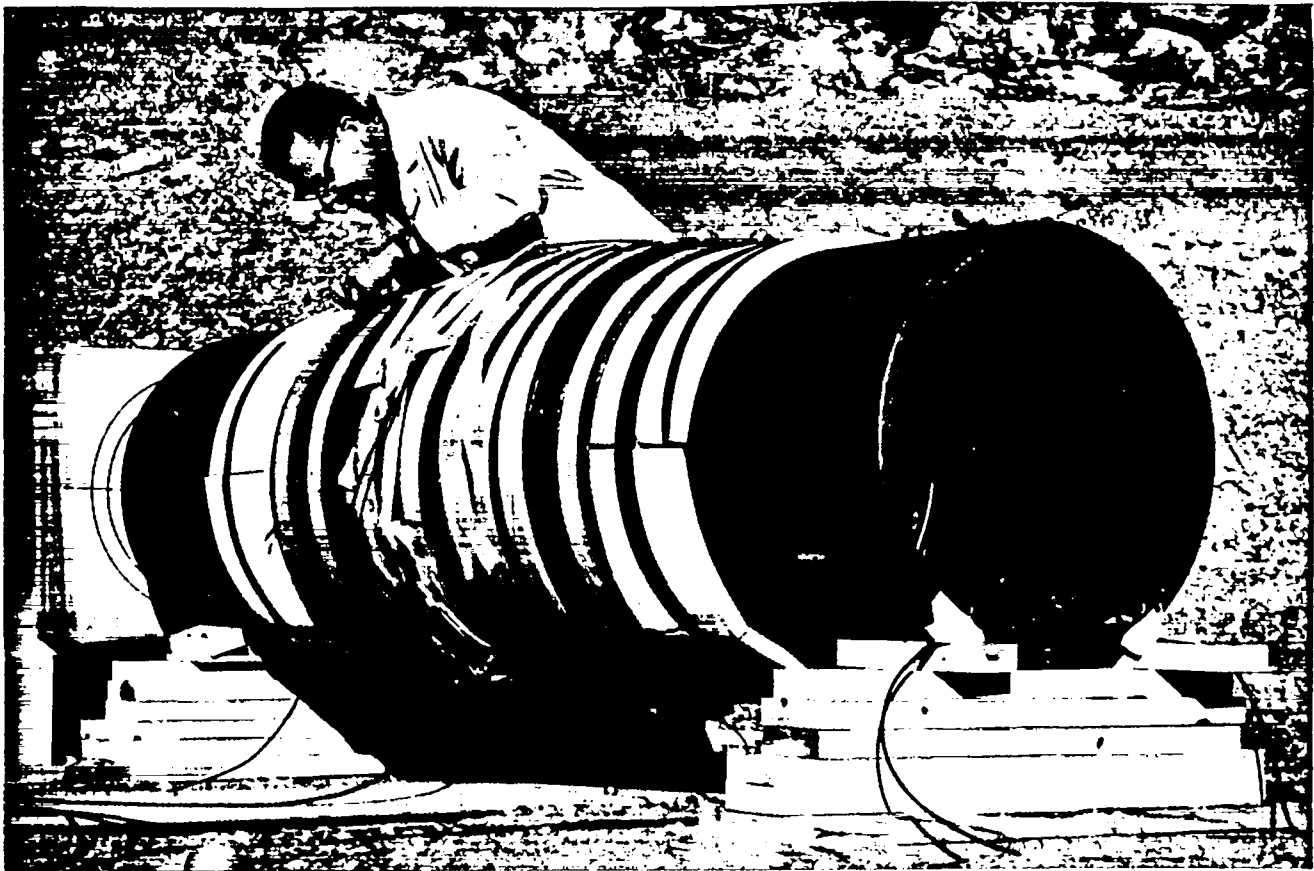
A 2-ft-diam, 1-in.-wall copper pipe with externally mounted explosive charge prior to test. The 1-in.-thick layer of 2 lb/ft³ foam plastic is seen between the explosive and the pipe. For development tests the detonators were taped in position and only a minimum amount of tape was used to secure the HE to the pipe.
